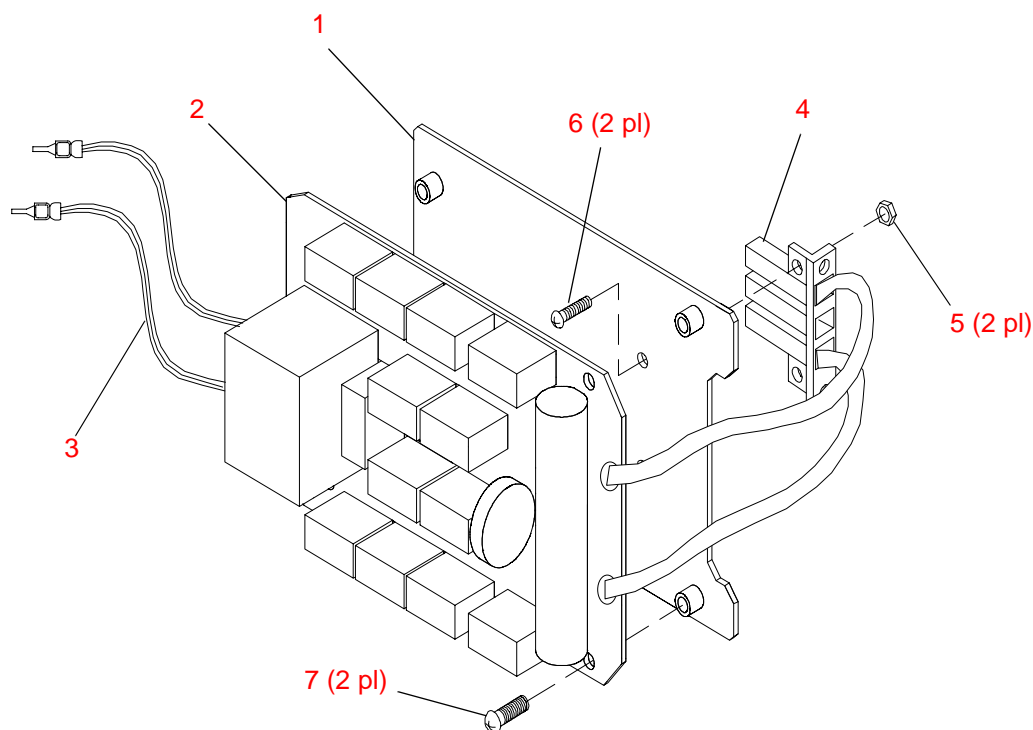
VL6B/VL6C Ignitor Board Assembly
